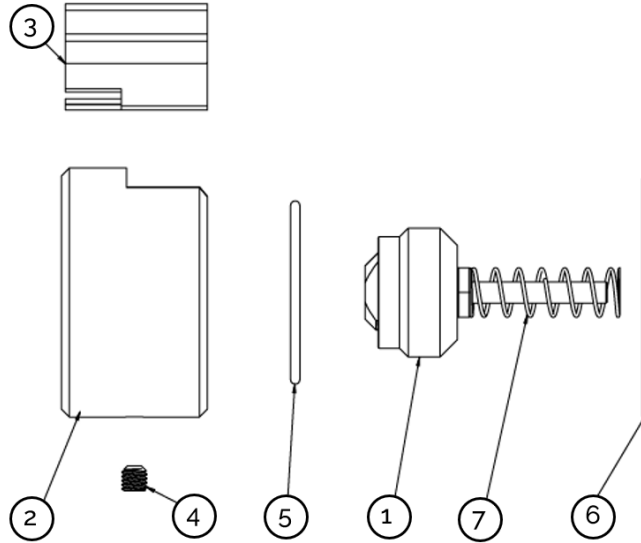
Exploded View of Cycle Counter Upgrade Kit (42204)
